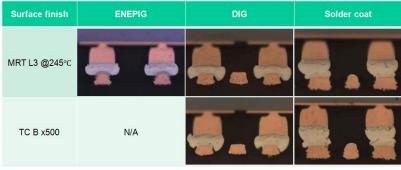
Cross-section of post 500TCB for DIG and Solder coat
